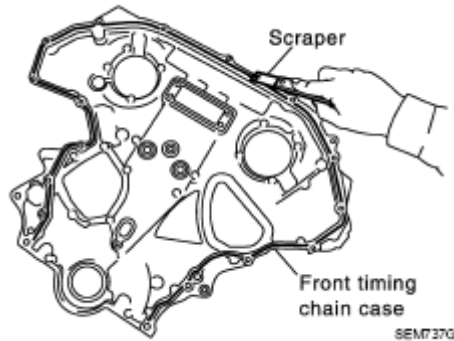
Removing Liquid Gasket From Front And Rear Timing Chain Cases Using Scraper
